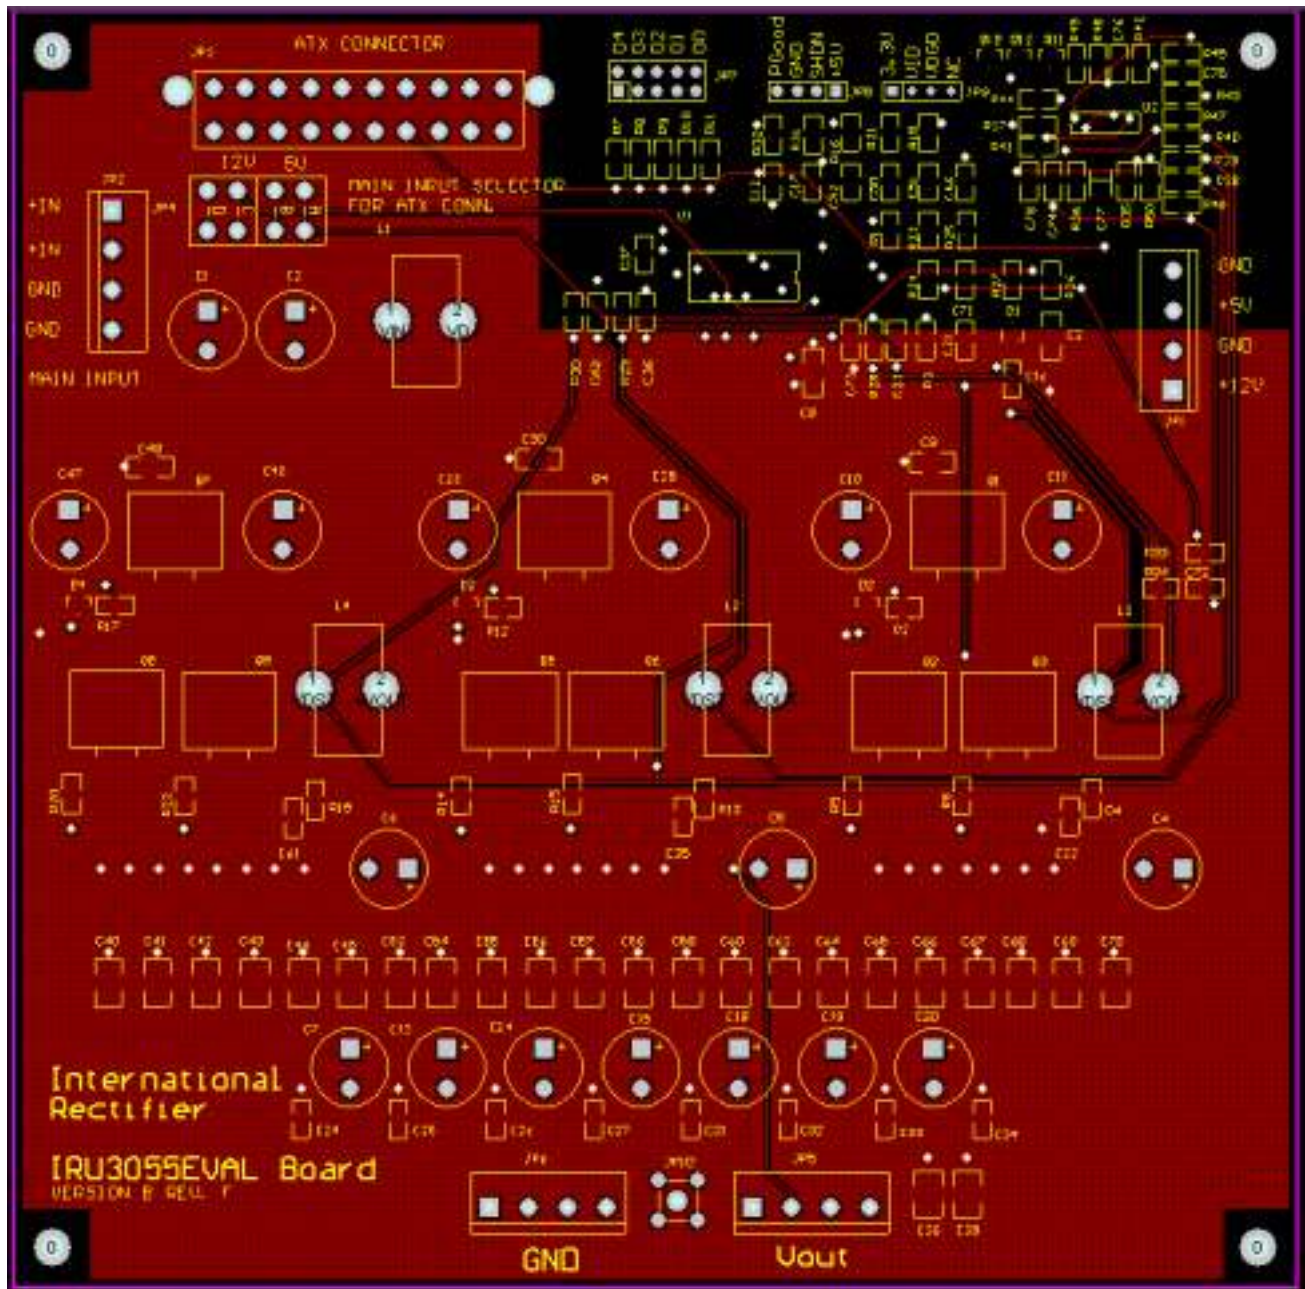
Second layer of IRU3055 demo-board PCB layout.
